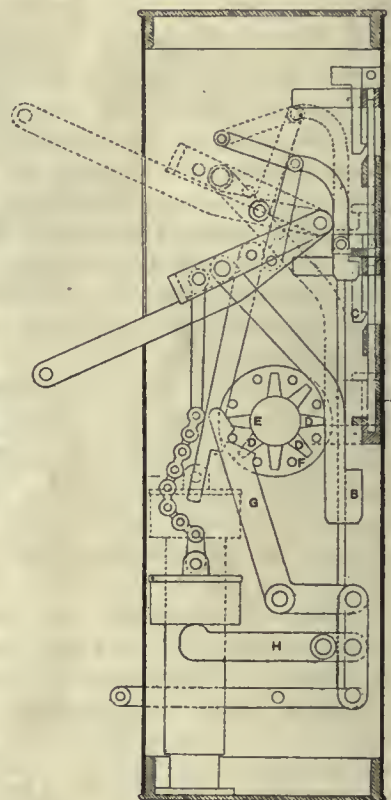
END ELEVATION WITH END PLATE REMOVED
